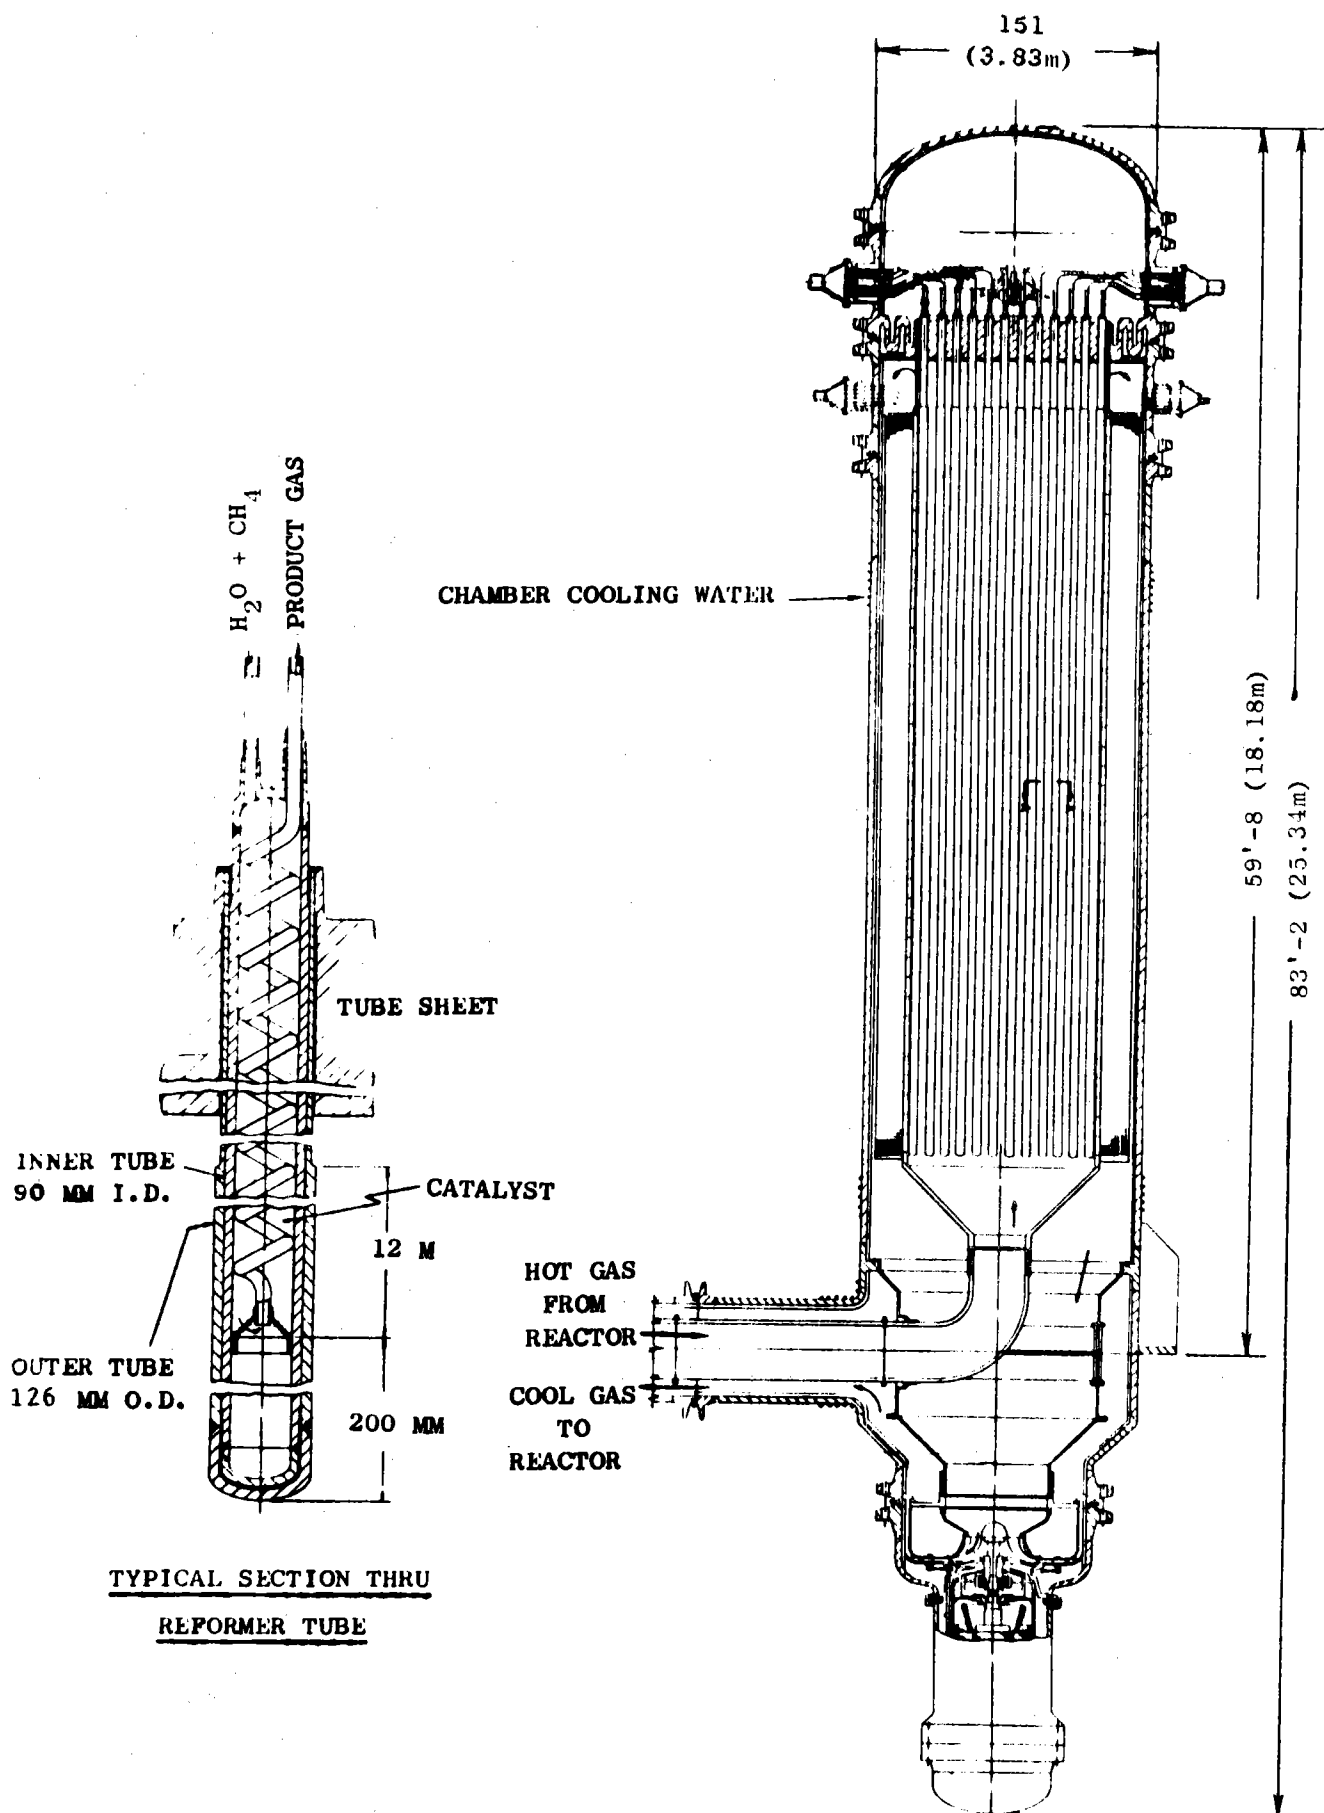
Reference Design for the Duplex Tube Steam Reformer/Steam Generator Assembly.
